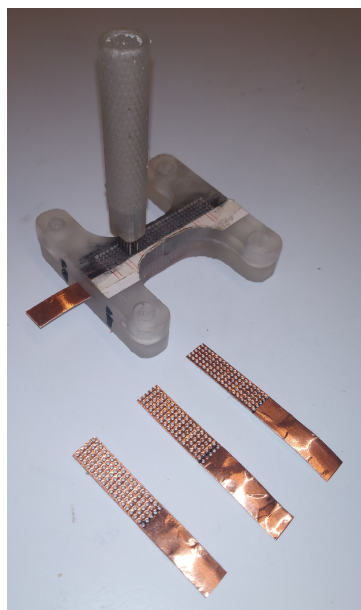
The jig securing a piece of copper tape along with the handpiece inserted to perforate the tape. A set of perforated copper tapes are shown beside the jig. [12].
